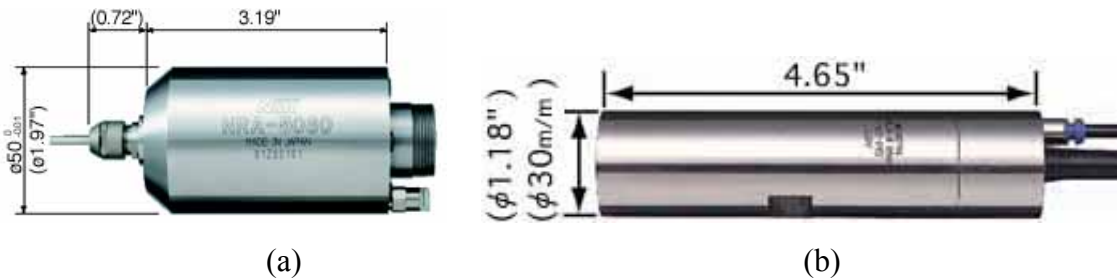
Spindle assembly; (a) Air spindle (NSK Astro NRA-5080) (b) Electric motor (NSK Astro EM-805)
